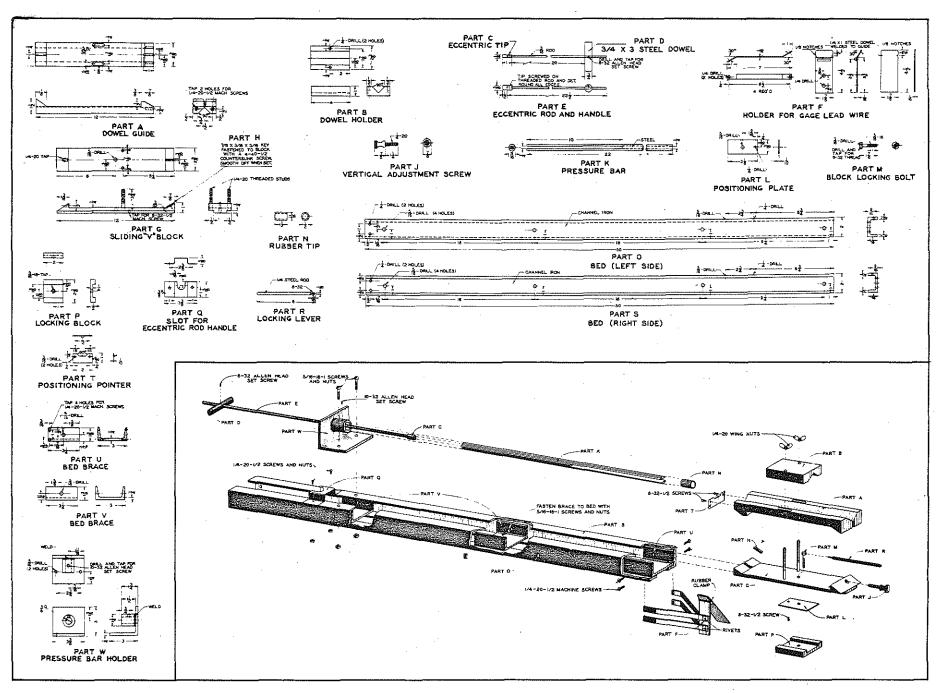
Detailed parts and assembly drawing of SR-4 strain gage mounting device.
